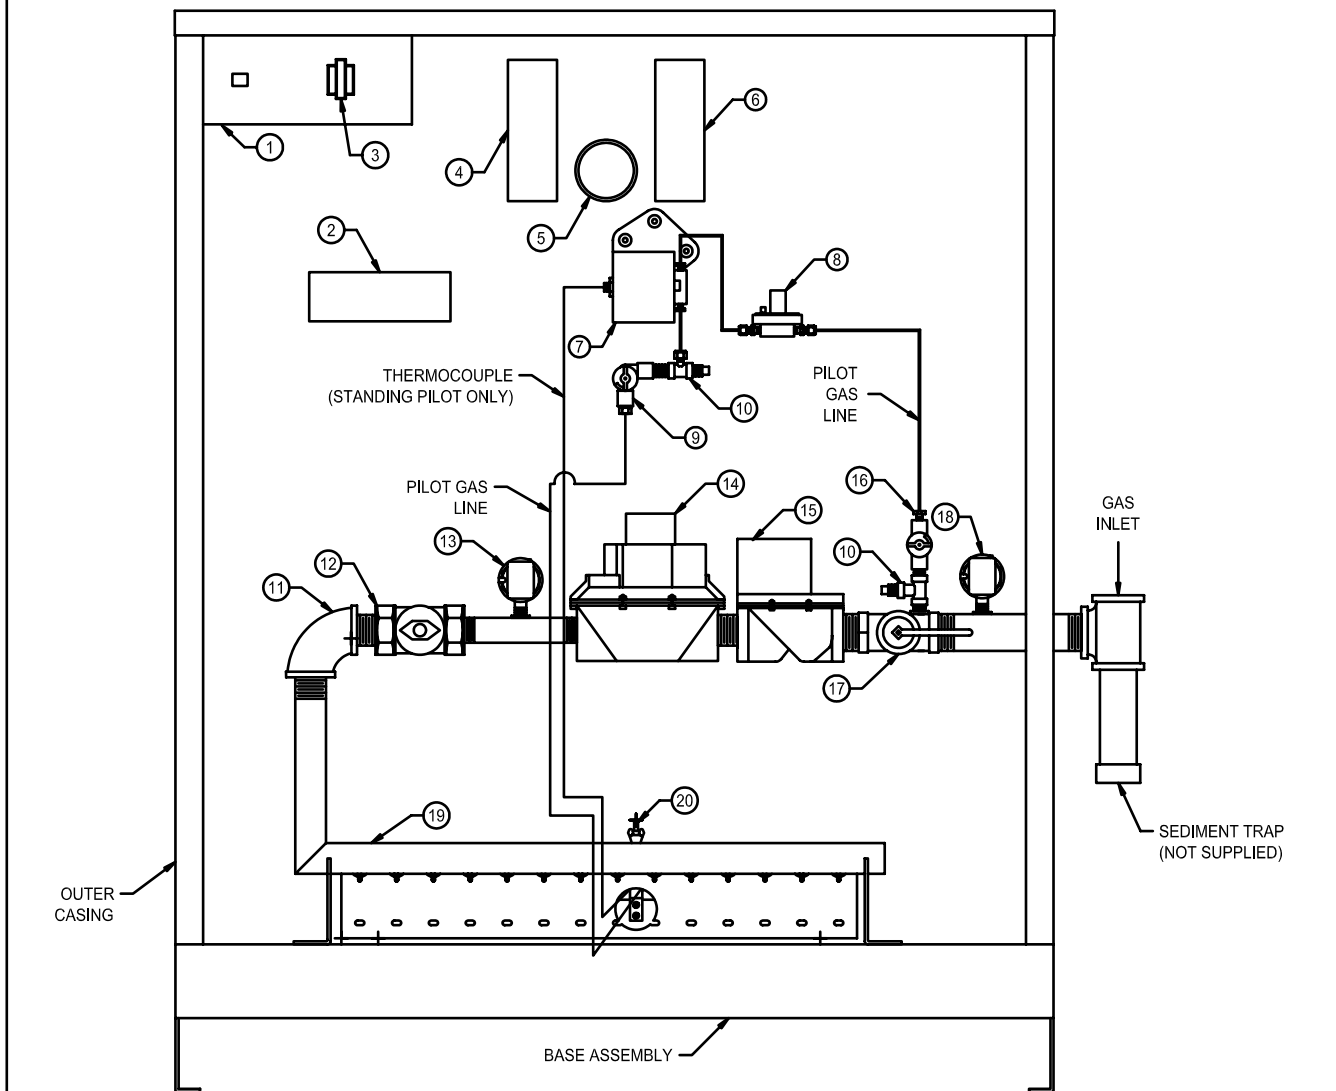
TYPICAL GAS TRAIN ASSEMBLY AND CONTROL COMPONENT LAYOUT FOR RESIDENTIAL INSTALLATIONS
